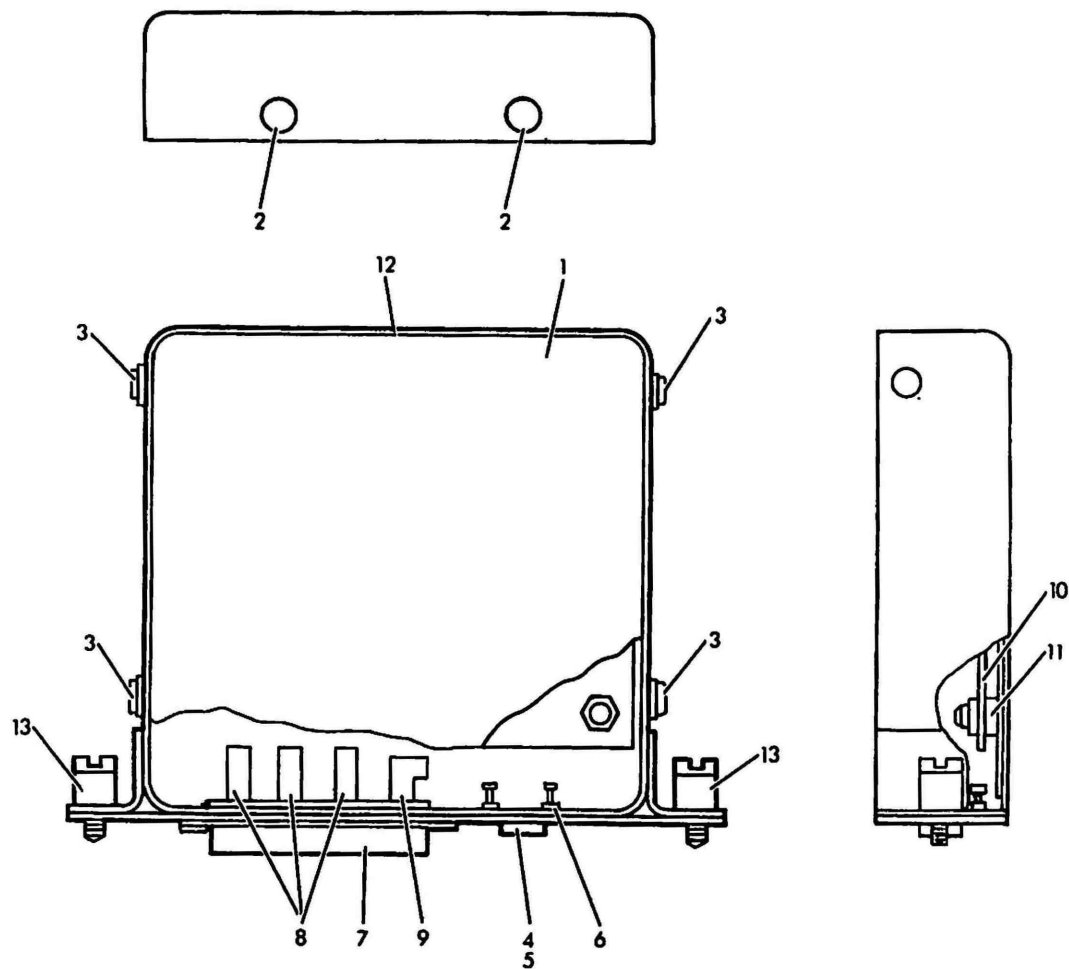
Loop Integrator and Regulator Board Assembly (Sheet 1 of 2)
